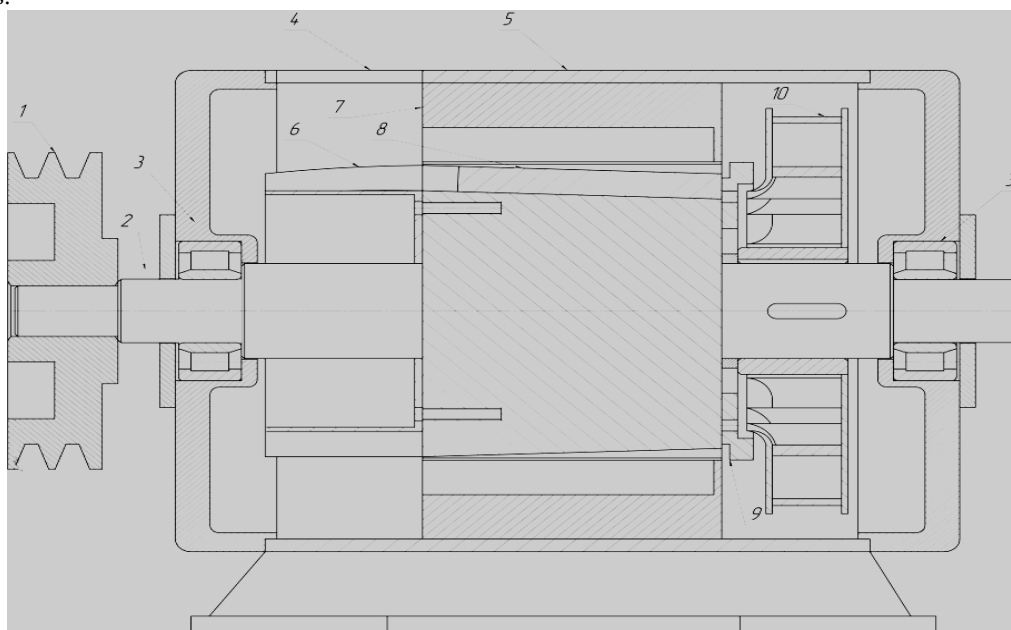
Rotary centrifugal unit with a horizontal rotor
